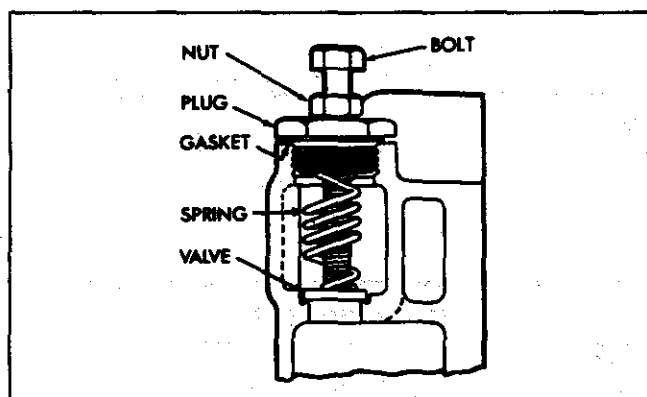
Bypass Valve with Modified Valve Plug Installed
